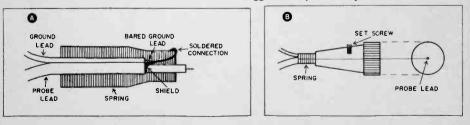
(A) Spring connections; (B) completed connector assembly.
